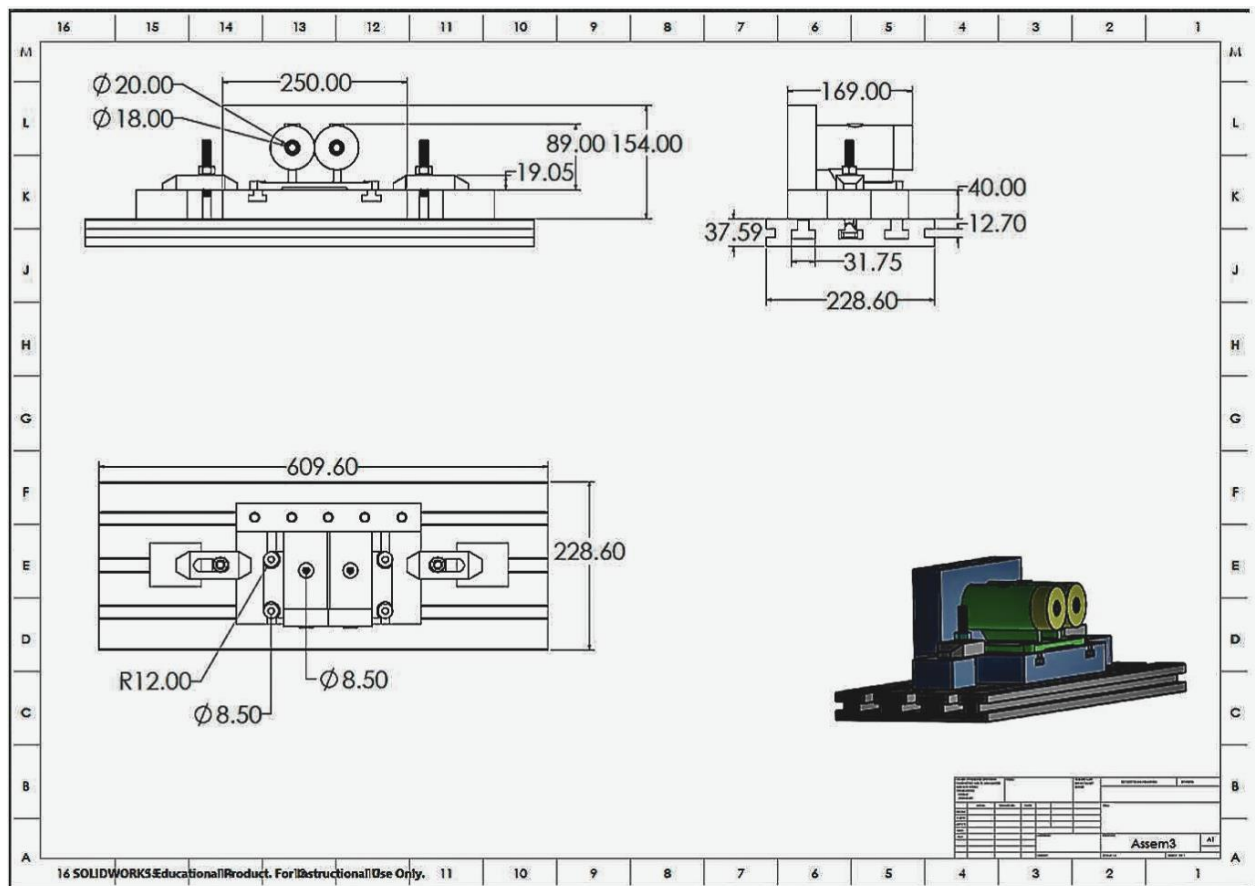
Assembly drawing of a fixture for 2nd operation
